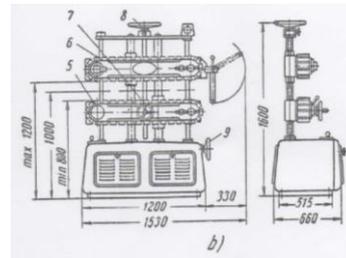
Auxiliary devices for the manufacture of tubes, (b) - From caterpillar to the tube drawing
